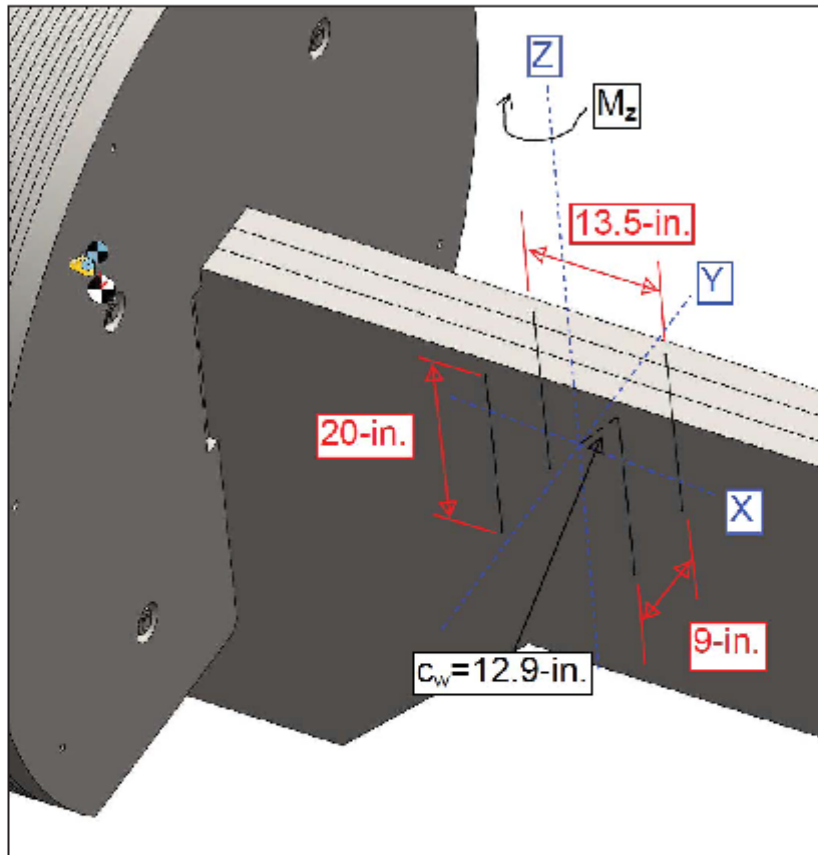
Weld Group attaching saddle bundle assembly to strongback beam
